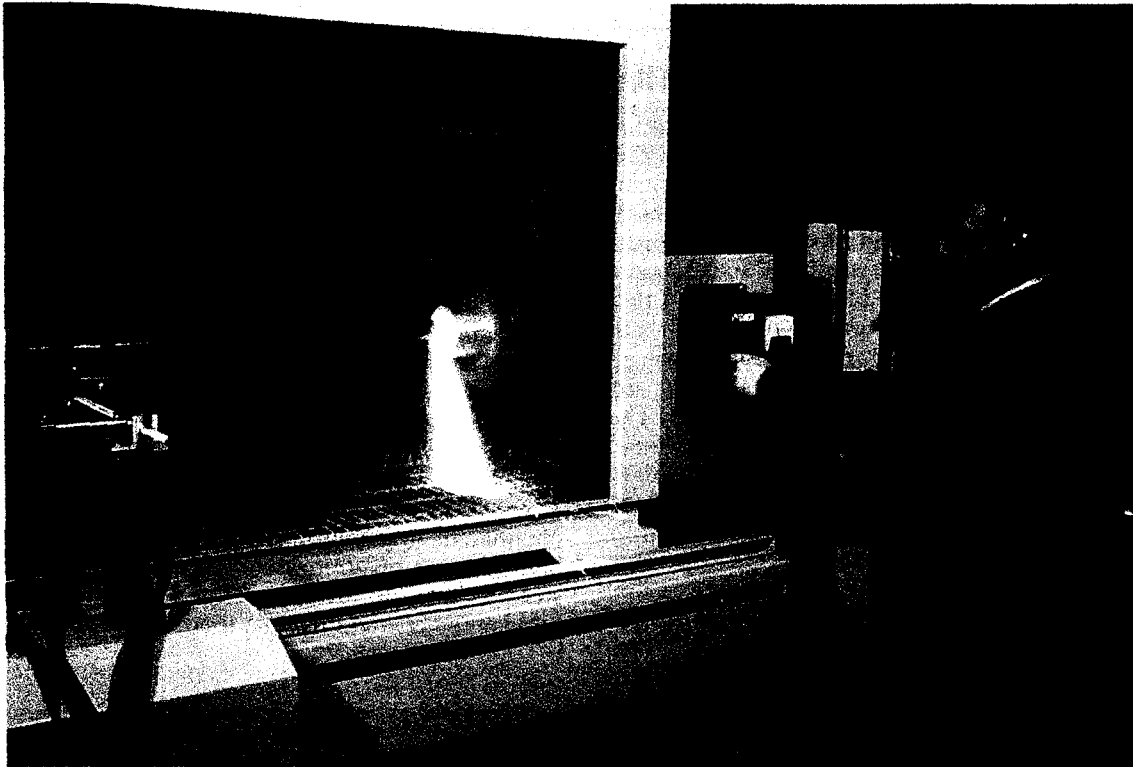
Wire Arc Spray Gun Used to Deposit Nickel Aluminum Bonding Material on the I.D. of a 4-in. (100 mm) Diameter Steel Cylinder. Compressed Air Shears Off Droplets at a Right Angle to Axis of Spray Gun.
